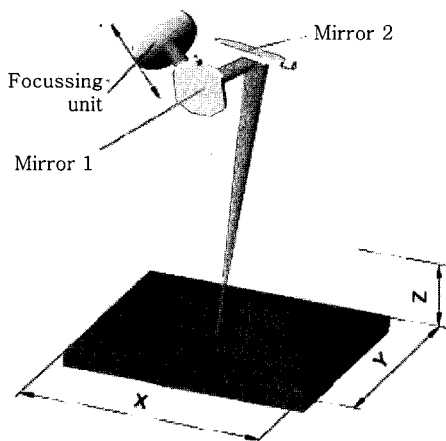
Remote laser welding (Courtesy of Trump Co.)
